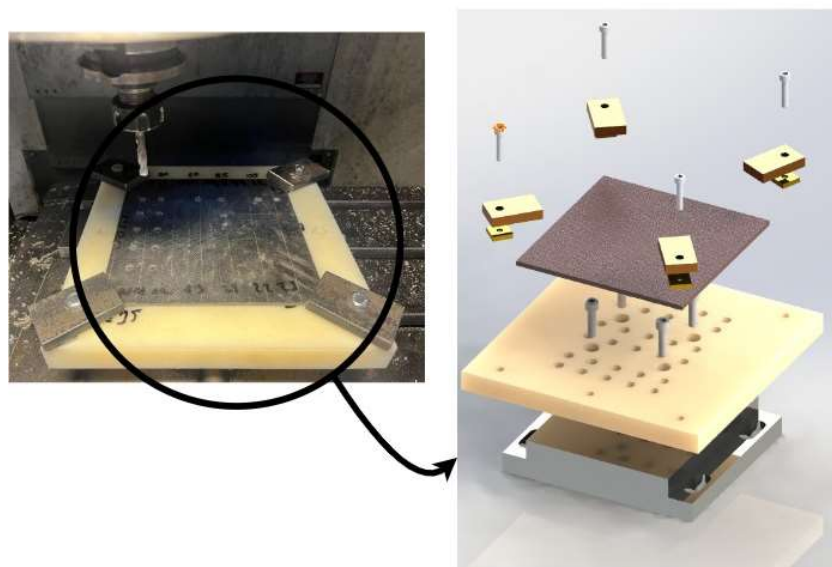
The drilling operations were performed on a CNC vertical machining center, utilizing a mold specifically designed for drilling and a dynamometer assembly for force measurement.
